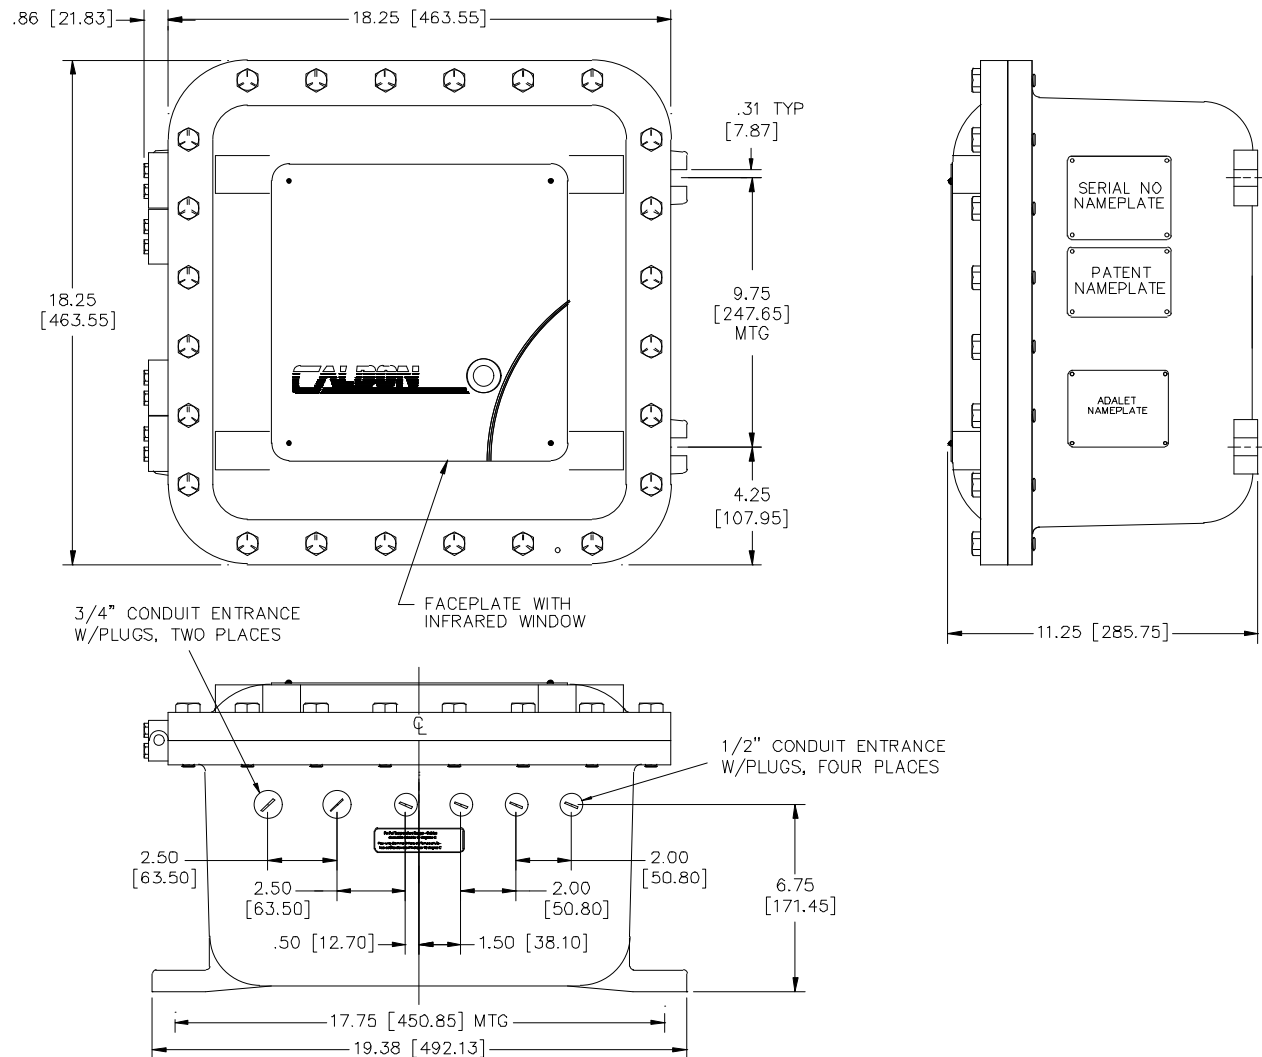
Explosion Proof Enclosure (Units in Inches [mm])
